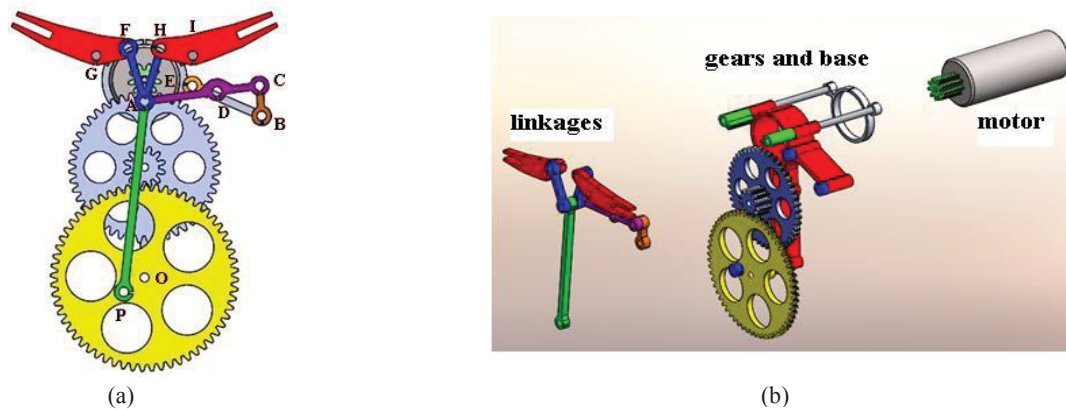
(a) FBL with Evans straight line mechanism assembly; (b) Exploded view of mechanism
